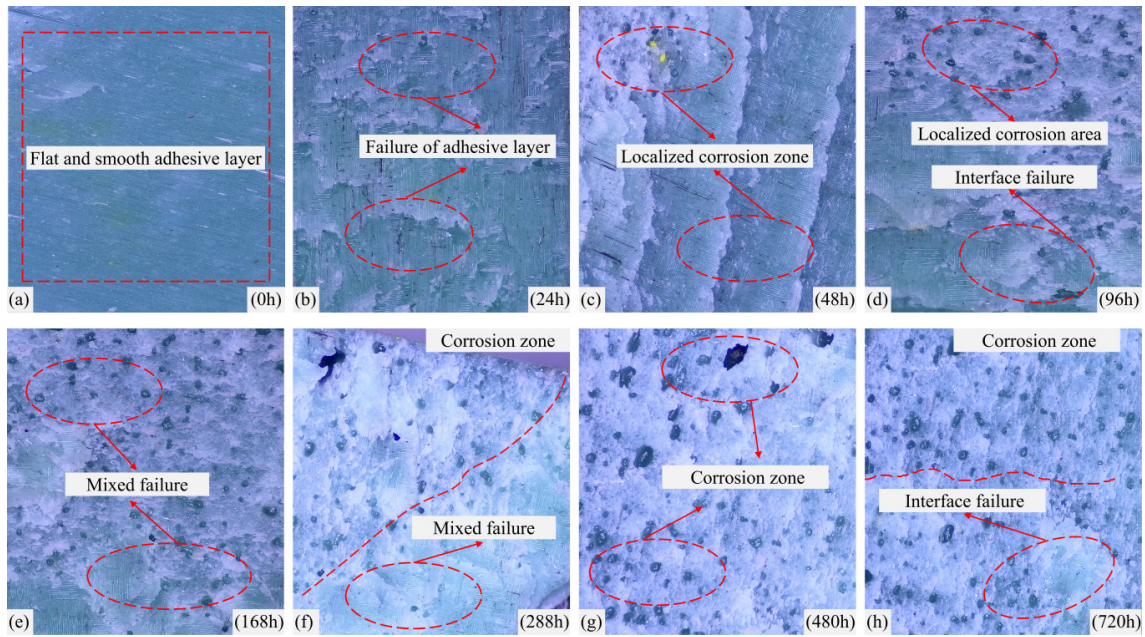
(a) Cross-sectional failure diagram of the bonding layer of an unaged specimen; (b) Section failure diagram of the bonding layer after aging the specimen for 24 h; (c) Section failure diagram of the bonding layer after aging the specimen for 48 h; (d) Section failure diagram of the bonding layer after aging the specimen for 96 h; (e) Section failure diagram of the bonding layer after aging the specimen for 168 h; (f) Section failure diagram of the bonding layer after aging the specimen for 288 h; (g) Section failure diagram of the bonding layer after aging the specimen for 480 h; (h) Section failure diagram of the bonding layer after aging the specimen for 720 h.
